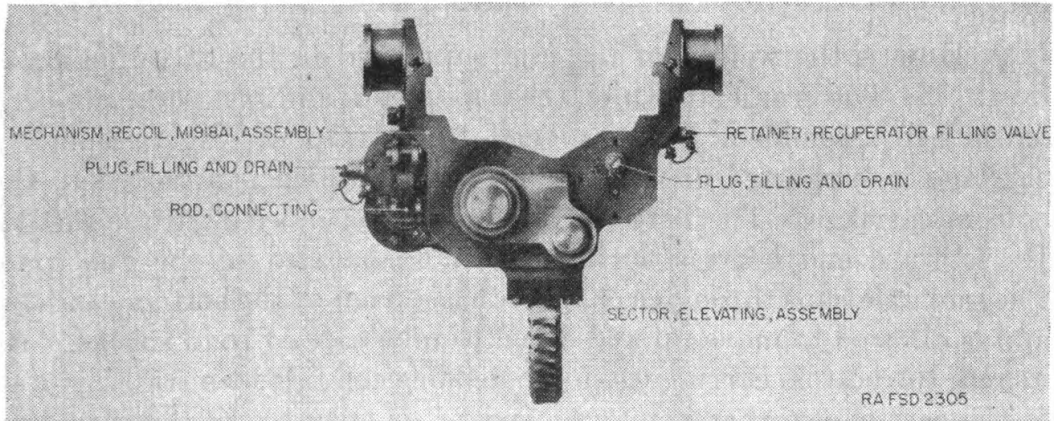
Recoil mechanism, 155-mm gun M1918—rear view.
